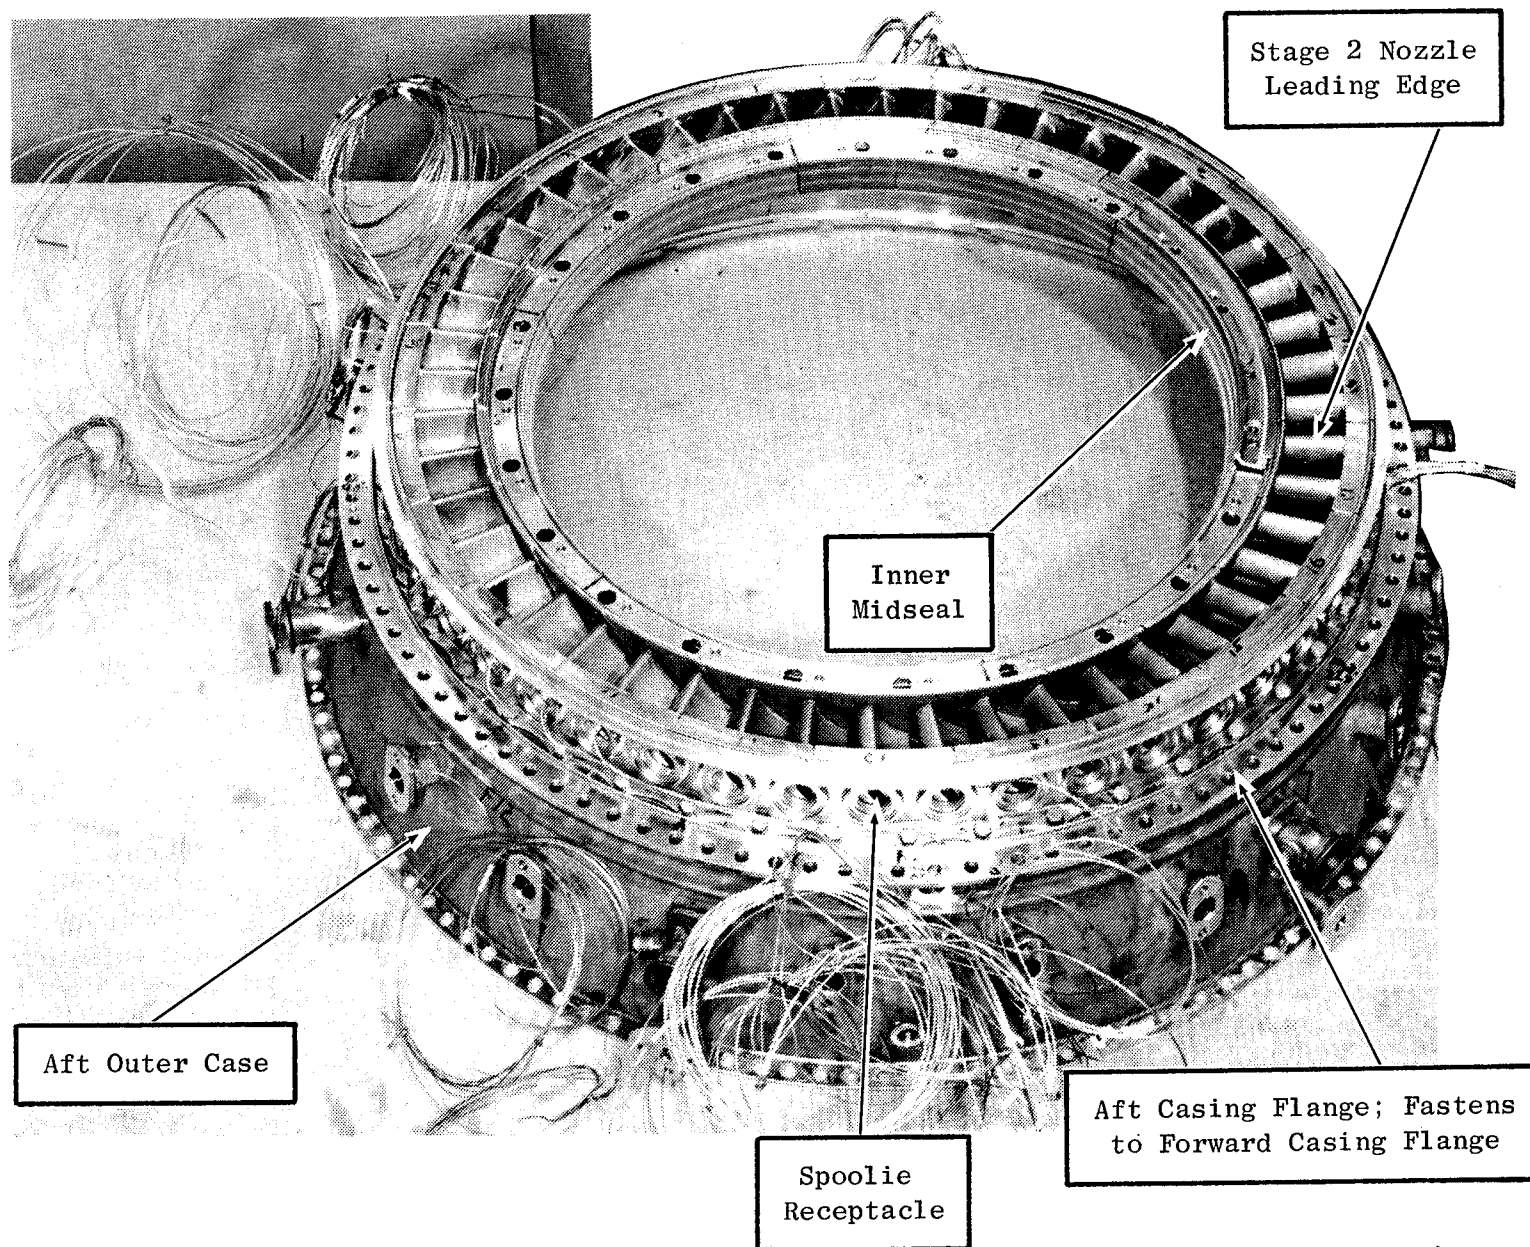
HP Nozzle Turbine and Combustor Assembly.
